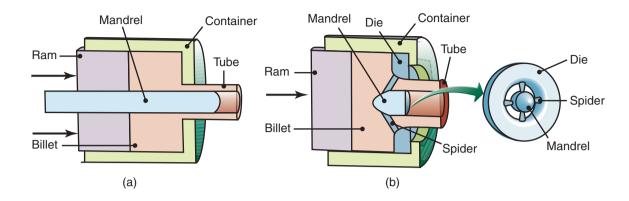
Extrusion of a seamless tube (a) using an internal mandrel that moves independently of the ram; an alternative arrangement has the mandrel integral with the ram, (b) using a spider die (see Fig. 15.9) to produce seamless tubing.
